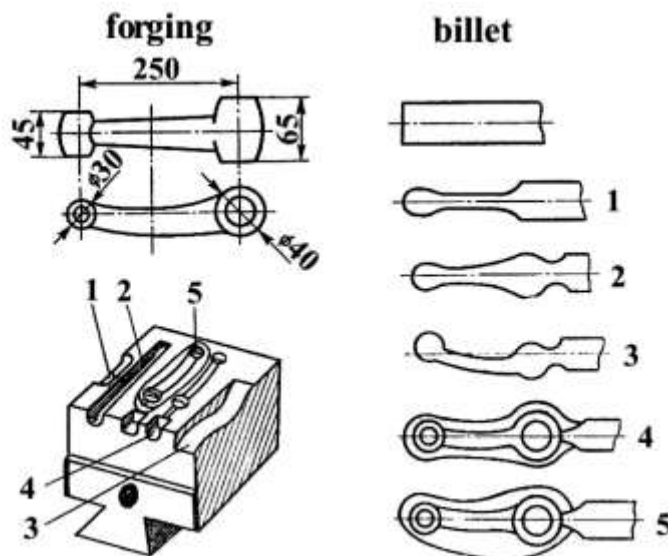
Multi-impession die and operations of forging: 1 – fullering; 2 – drawing (extending); 3 – bending; 4 – blocking; 5 – finish forging
